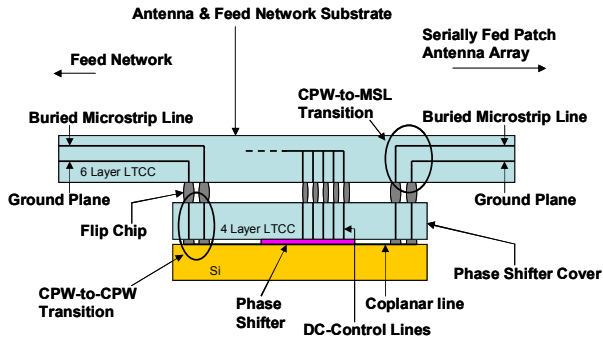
Hybrid integration of the packaged phase shifter on the LTCC antenna board
